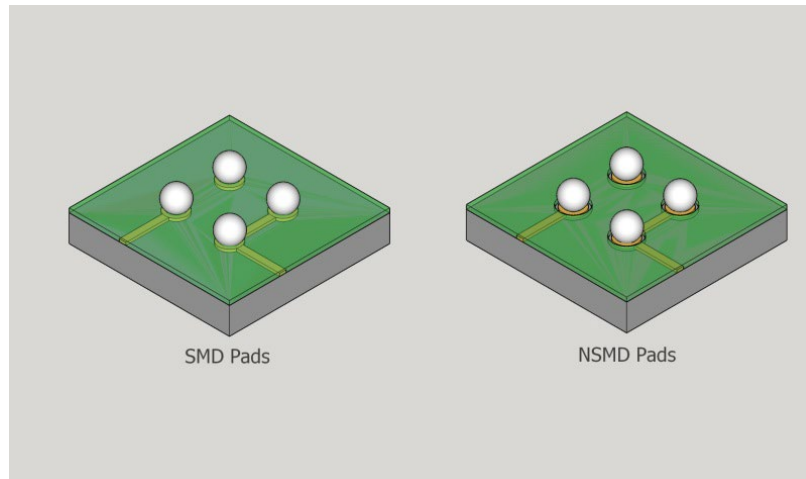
Isometric view of SMD and NSMD Pad Styles. Source [58].
